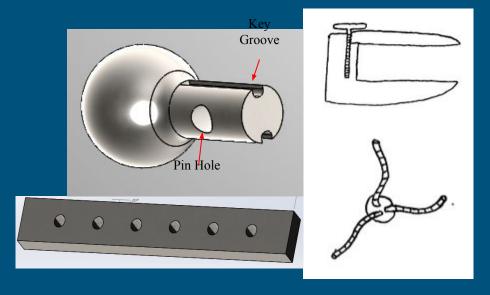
Complete head attachment assembly with bolt pattern and schematic of crescent wrench clamp and flexible finger head
